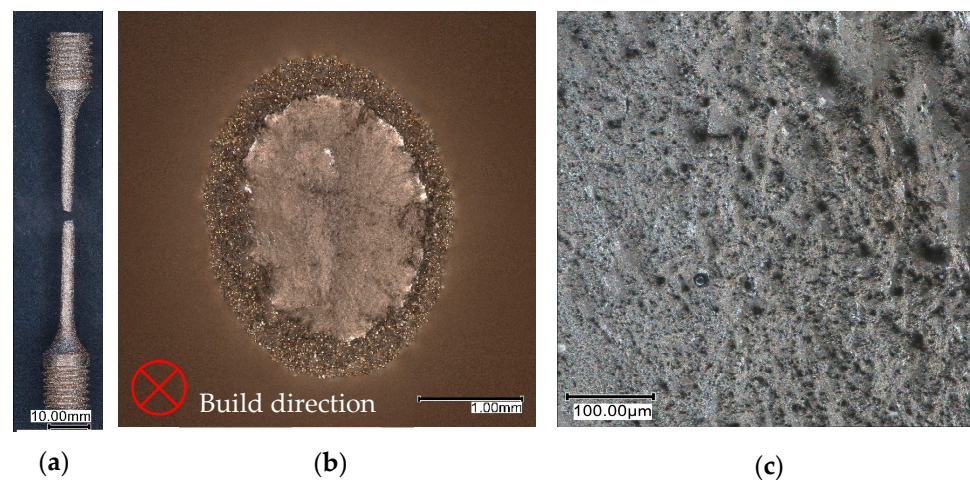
Fracture surface of the tensile test specimen: (a) specimen after tensile test, (b) fracture surface, (c) detailed part of the fractured surface.
